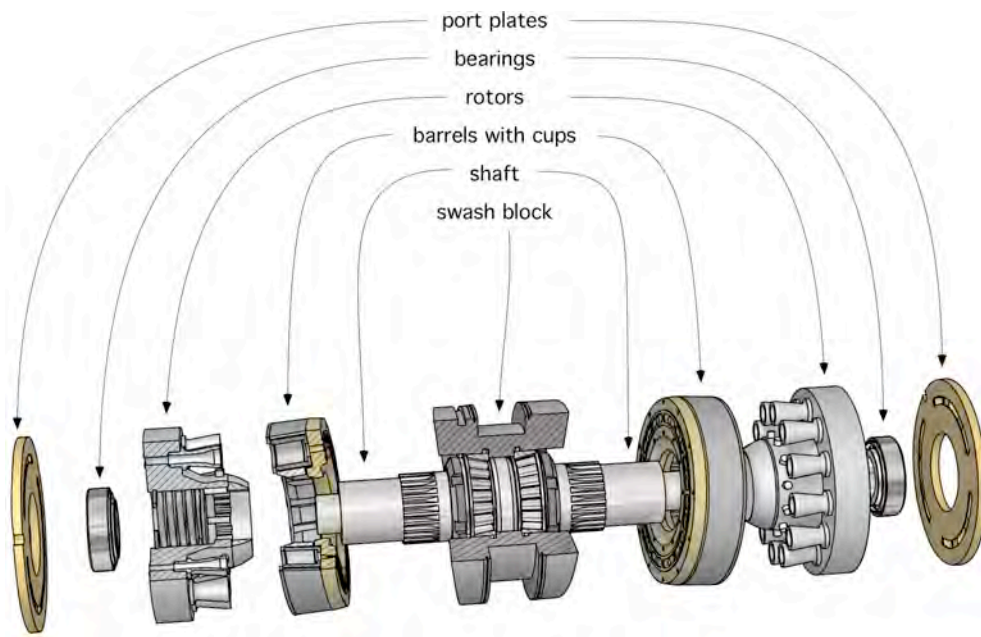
Exploded view of the main parts of the transformer, excluding the housing.
